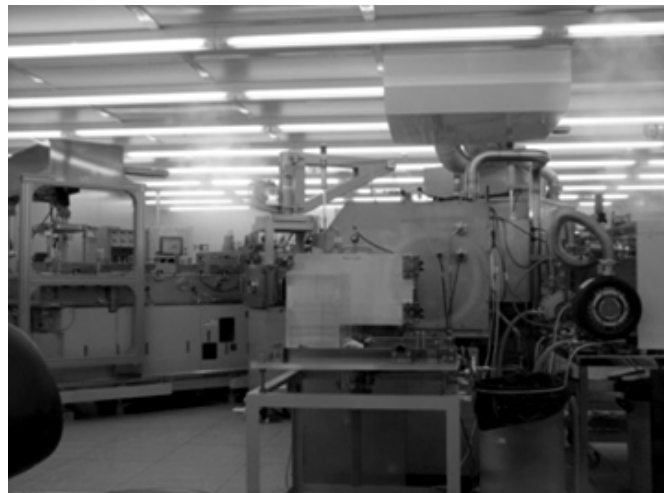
P-OLED product and process testing cleanroom (courtesy of CDT).
